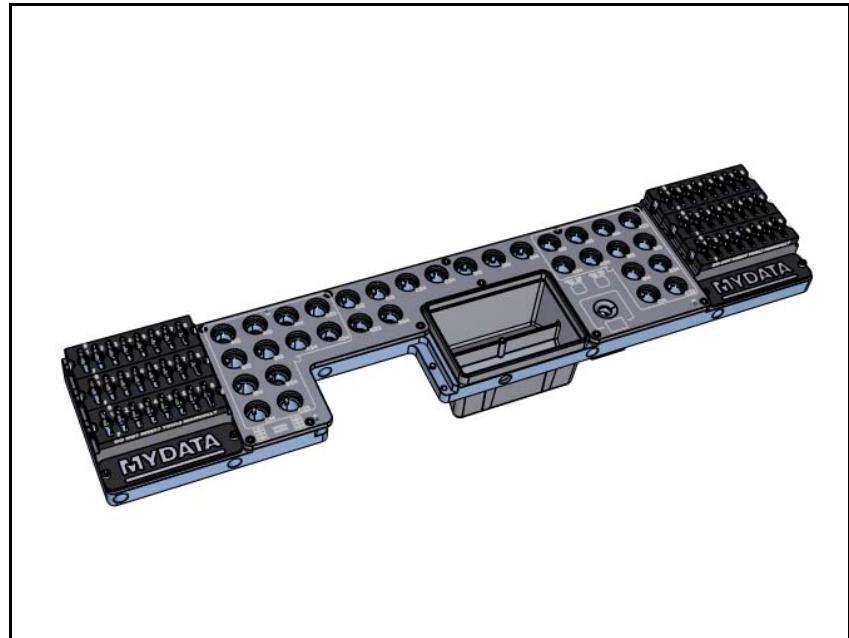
Midas and HYDRA tool banks (MY100DX).
